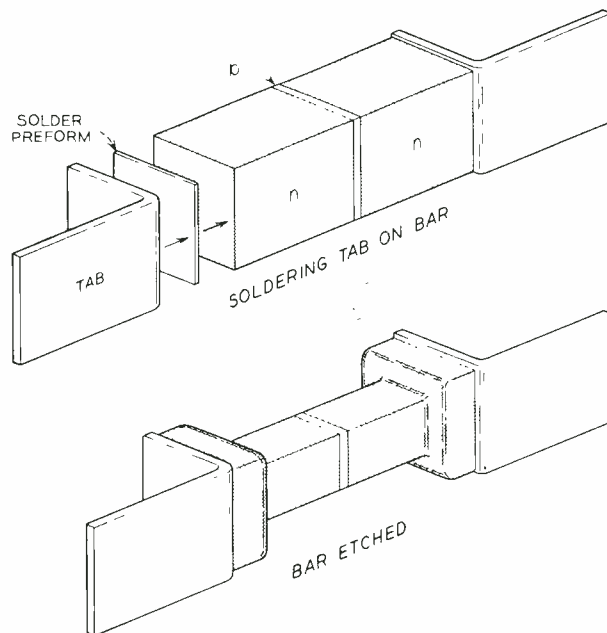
Assembly of the transistor: tabs are soldered to germanium bar, which is later etched to remove disturbed material from the surfaces.
